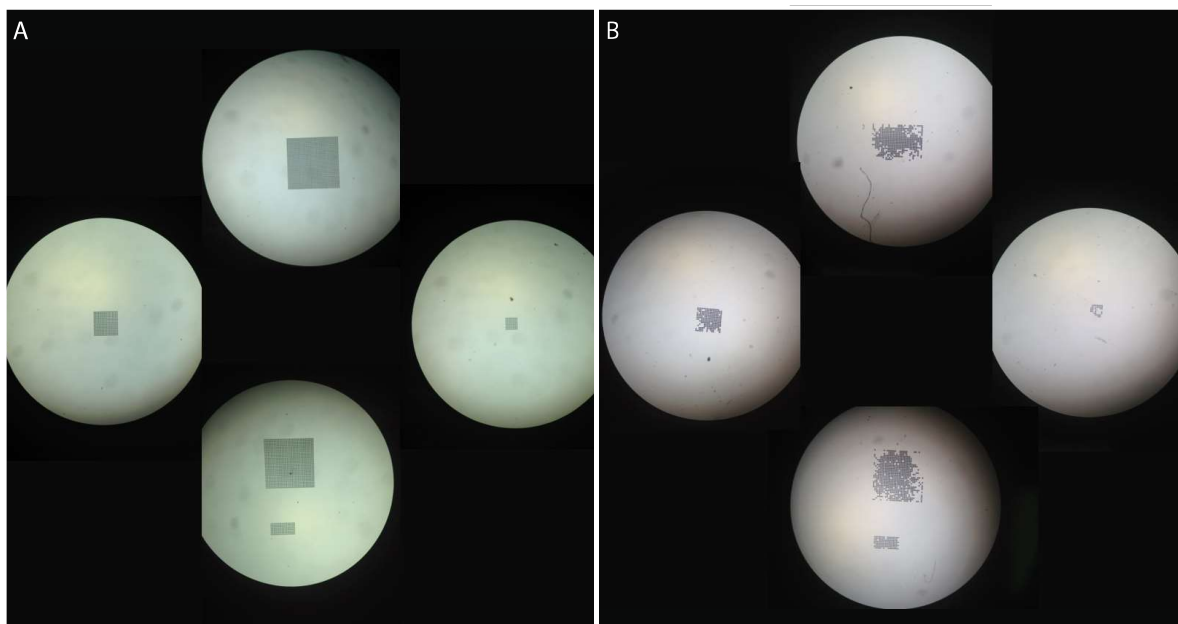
Results of imprinting at 130 °C, 3000 N, with a holding time of 10 min with a mold which is printed with the 25x objective. A: Mold before imprinting. B: Mold after imprinting.
